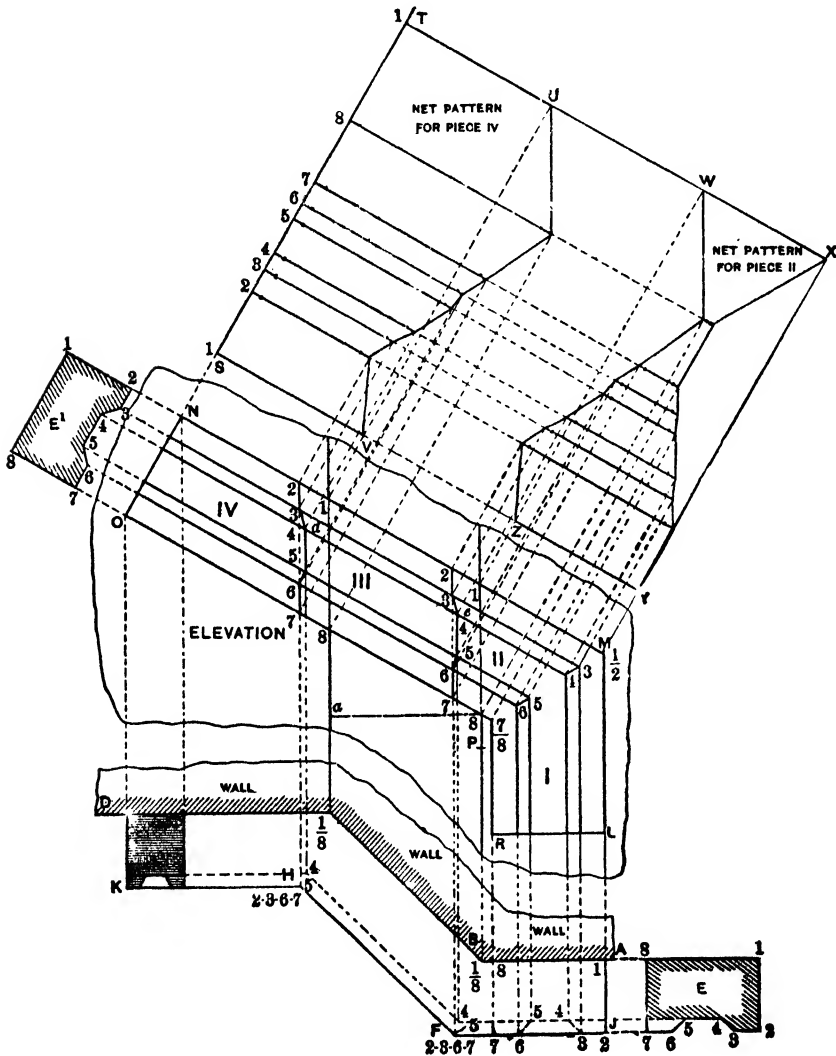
Plan, Elevation and Patterns for Pieces II and IV
